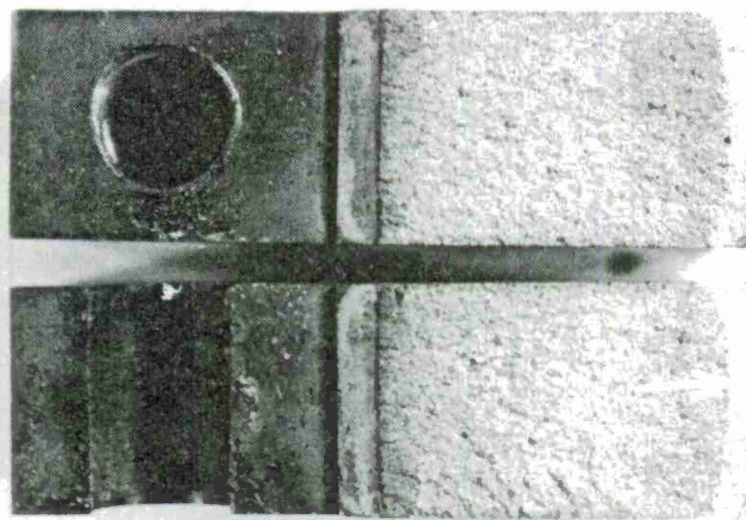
Modified WOL Specimen Showing Crack Arrest Line.
